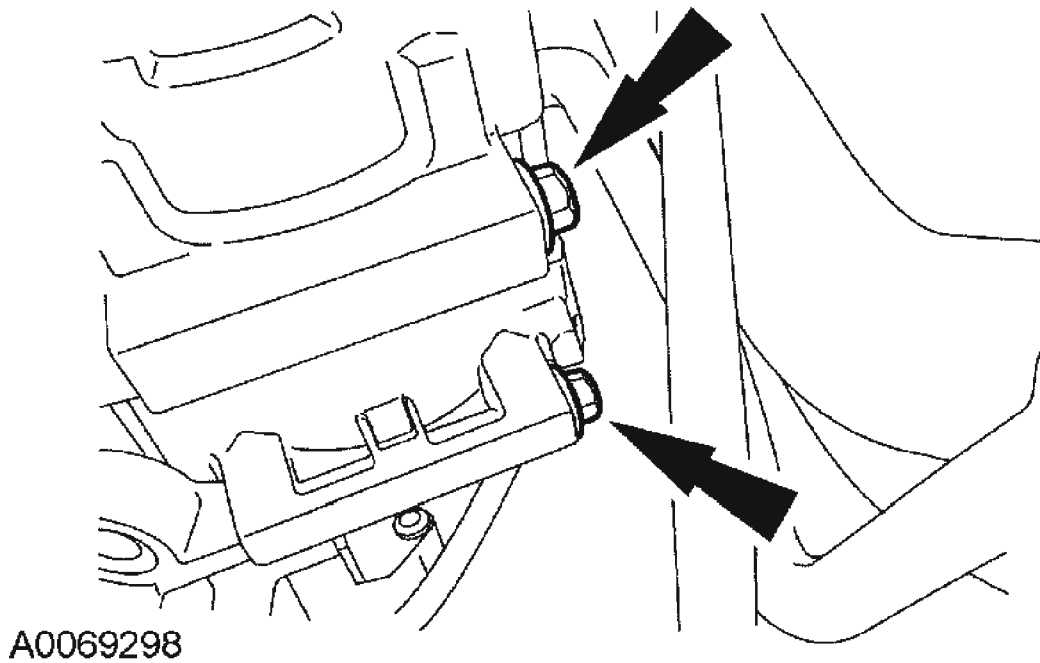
Removing Compressor Bolts And Lowering A/C Compressor
